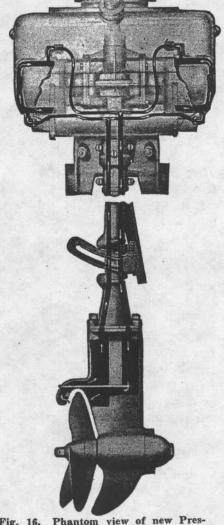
Phantom view of new Pressure-Vacuum Cooling System
